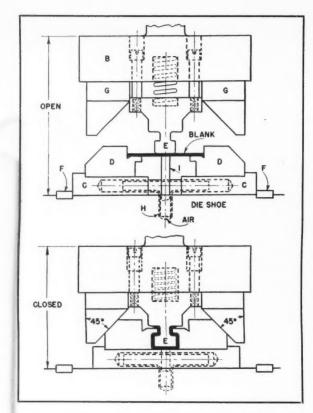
Drawing illustrating one of several available methods which may be employed to form a yoke section at one stroke of the press.
